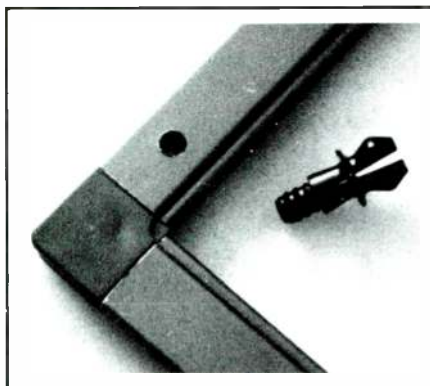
Aluminum pieces of grille cloth frame showing plastic corner piece and location of hole for stand-off.
